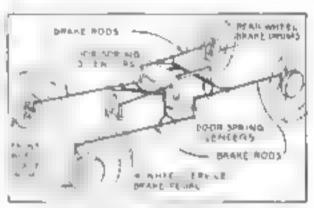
Old screen door aprings can be adjusted to your car to stop brake ratiling.
